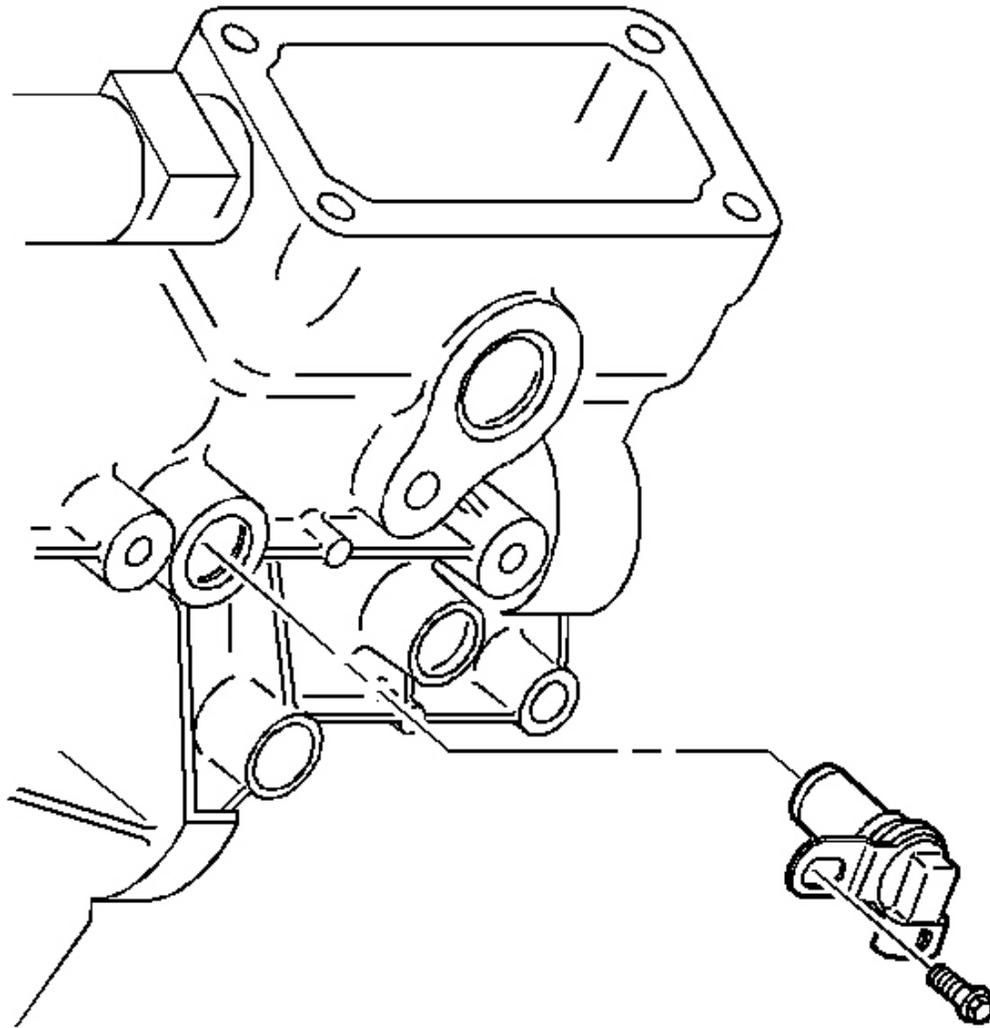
View Of Vehicle Speed Sensor (VSS)
